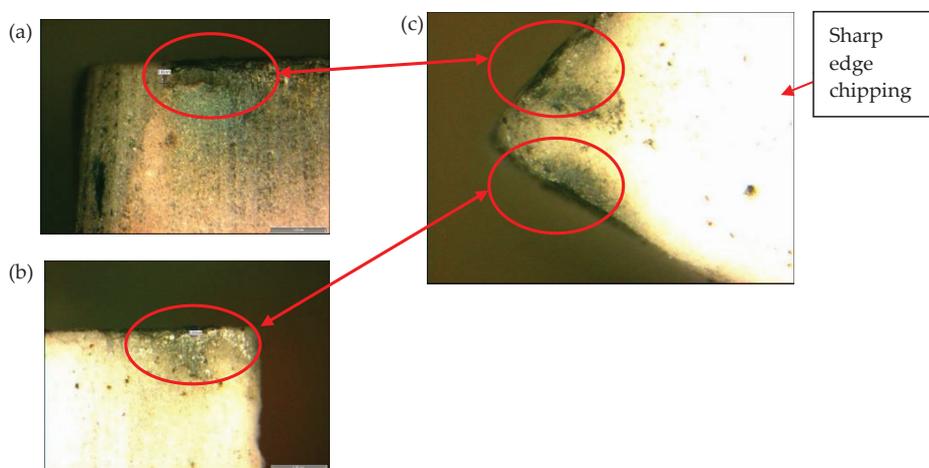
Wear at the edge of cutting tools: (a) Right flank side of tool, (b) Left flank side of tool and (c) Top side of tool
